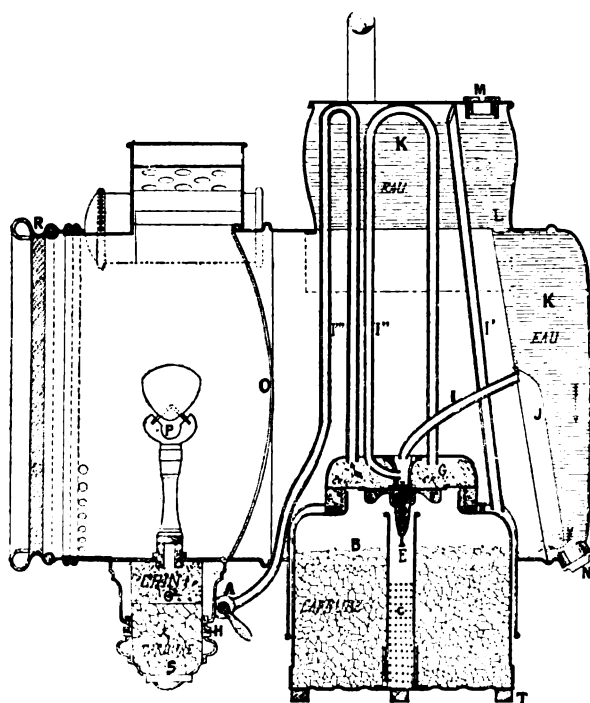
SECTION OF DUCELLIER ACETYLENE LAMP.
